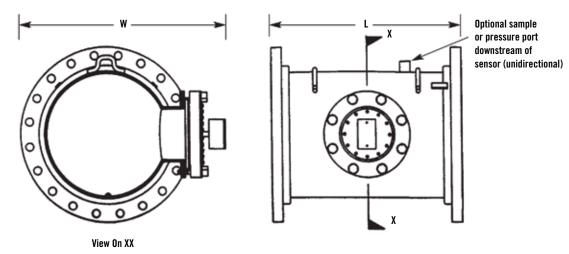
Dimensional Drawings for Metal UniMag (DS)
